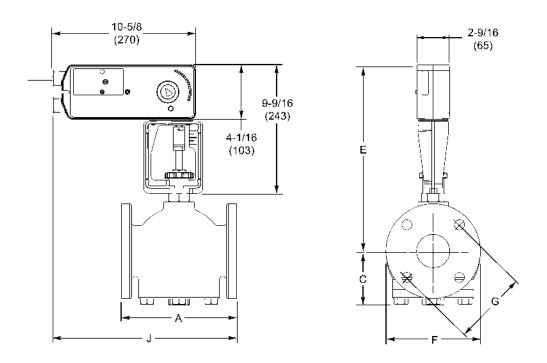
MX61-720X with 2-1/2" to 4" N.C. 2-Way Flanged Globe Valve.
